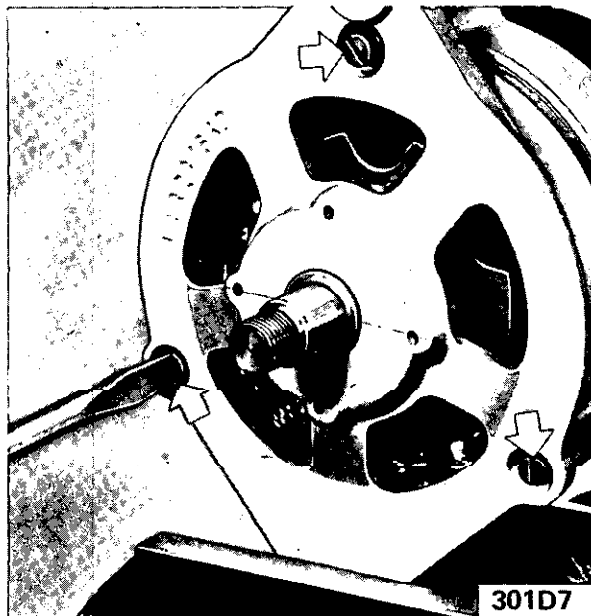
D-7 Removing Drive End Frame and Rotor Assembly
